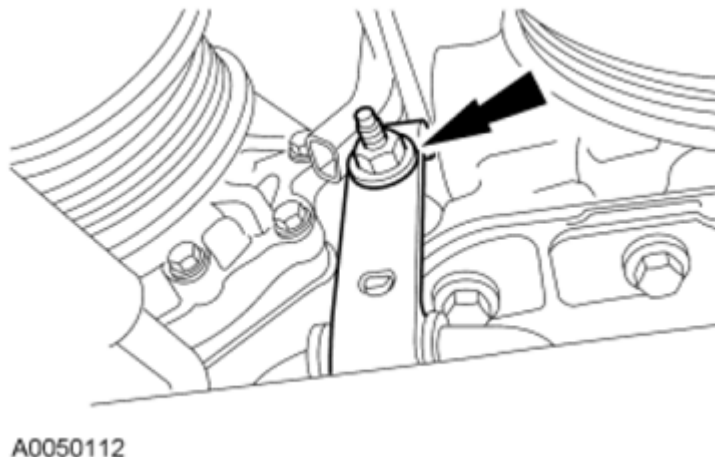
Locating Transmission Oil Cooler Tube Bracket Bolt
